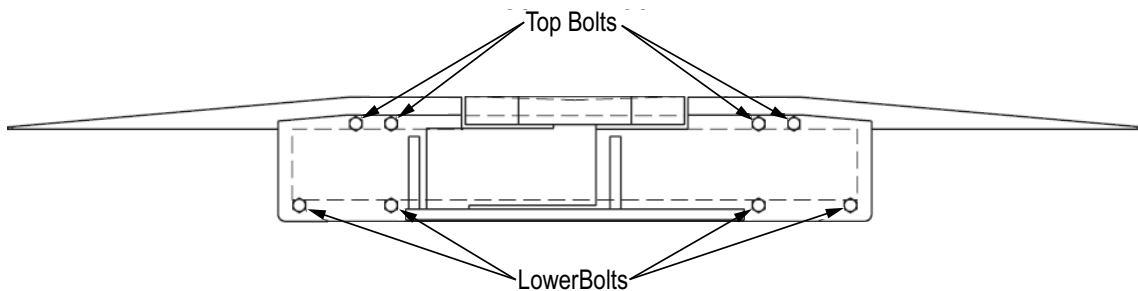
Top and Lower Bolts of Scale Mounting Bracket
